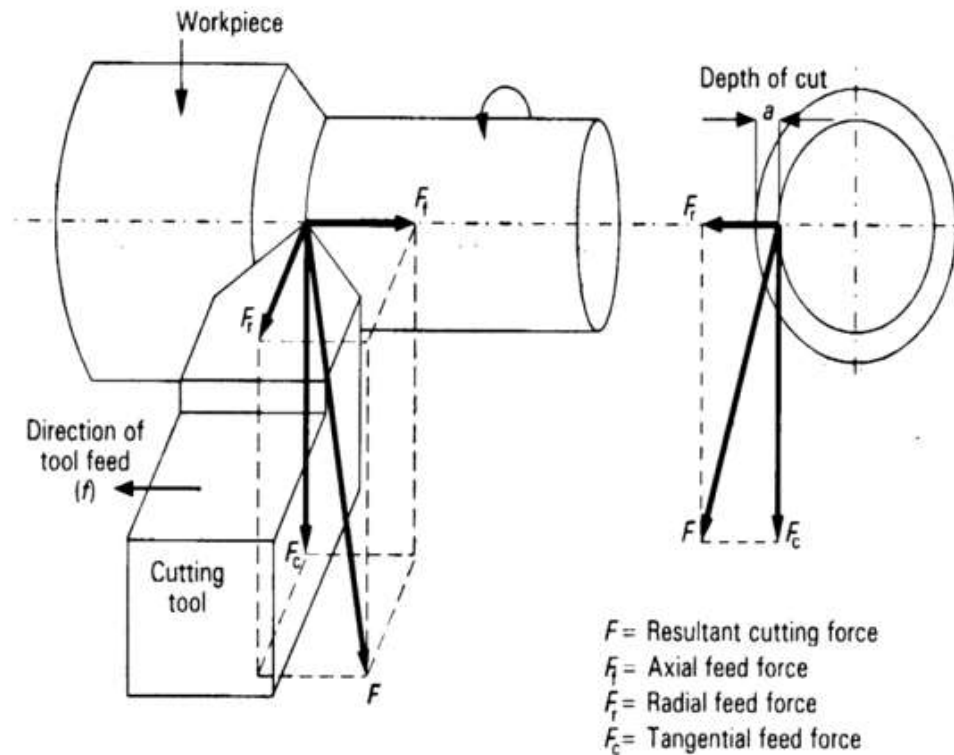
Cutting Forces Acting on Cutting Tool [1]
